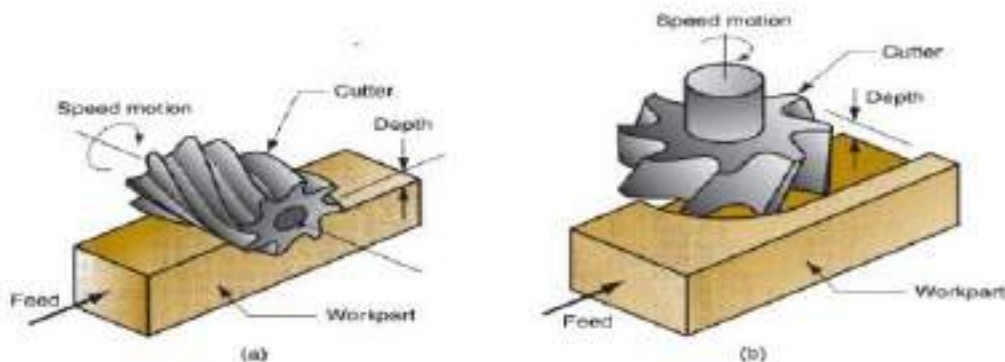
Two basic types of milling operations: a) peripheral or plain milling, b) face milling
